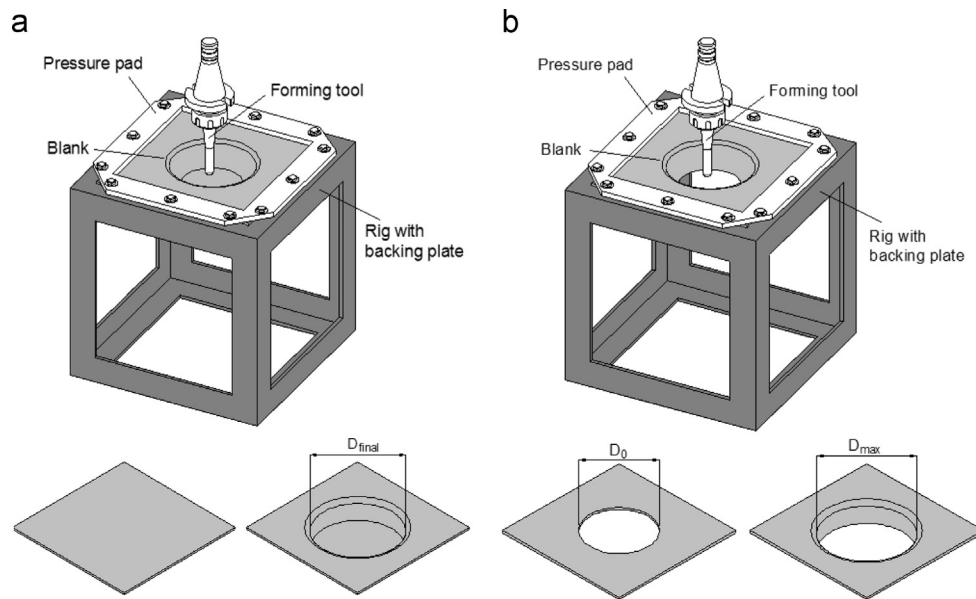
Schematic representation of the fabrication of (a) sheet metal parts and (b) flanges in sheet metal blanks with pre-cut holes by means of SPIF.
